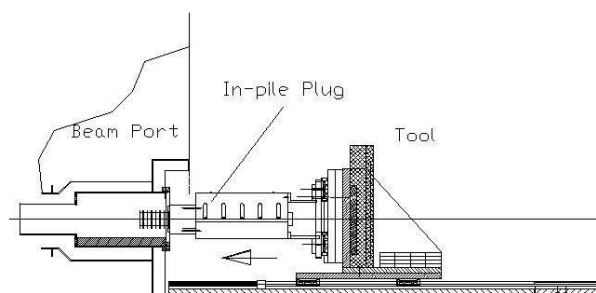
The installation process of the in-pile plug assembly at CN beam port
